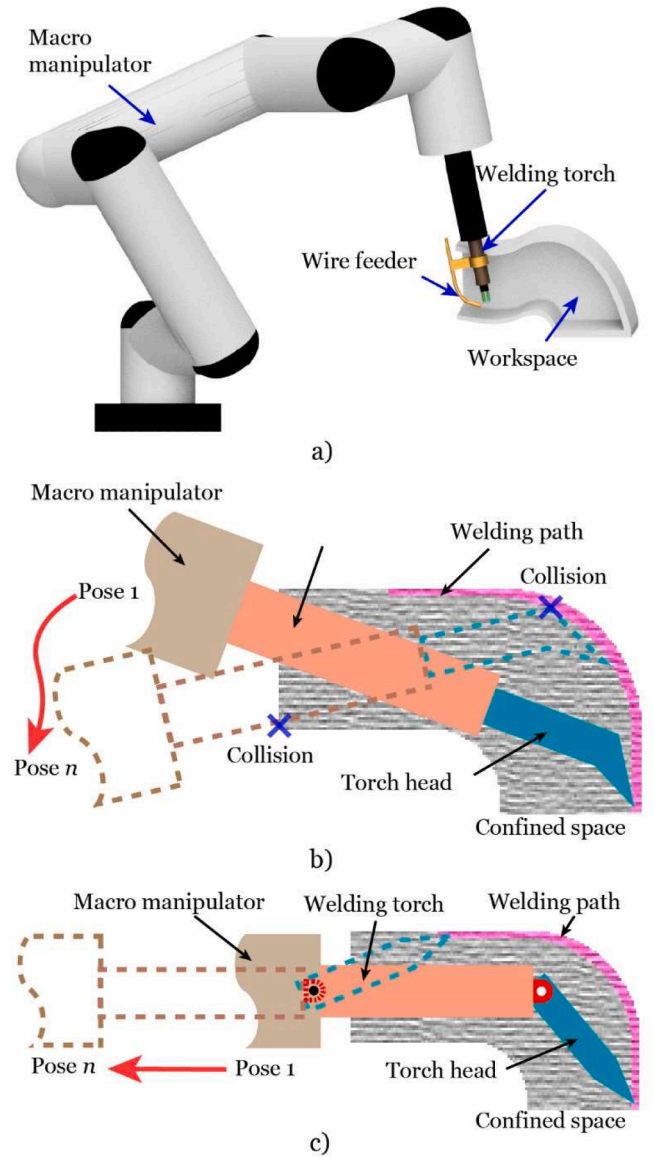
Example of robotic welding system and its potential problem for access to confined spaces. a) An example of the conventional robotic welding system with a rigid welding torch is trying to access a confined space; b) The rigid welding torch on the robotic arm makes it difficult to achieve a continuous welding path without collision in confined spaces. c) One potential solution is enabling the welding torch more DoFs to make it flexible to access confined spaces and achieve the desired welding path.
